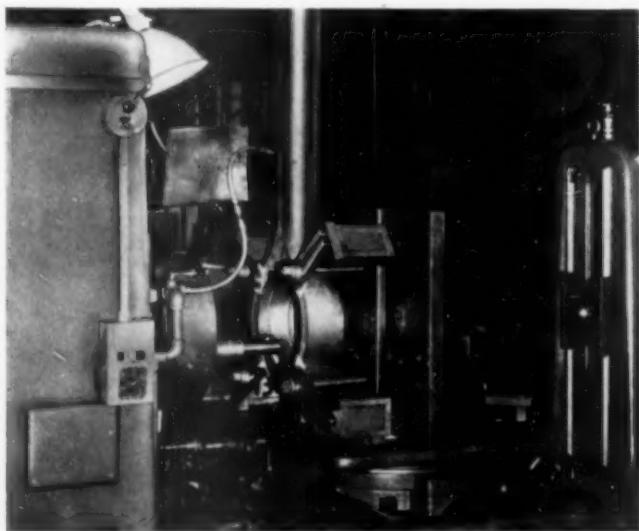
Boring, counterboring and threading is accomplished on both ends of a large connecting rod by mounting the workpiece on a backing plate, permitting machining of both ends on the one setting. In addition to the clamping, weight is further taken up by means of a suspended chain falls.
